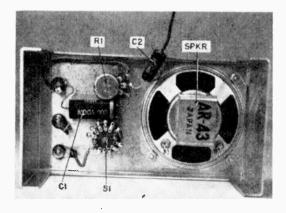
Chassis-mounted parts inside the box cover include the speaker, switch, potentiometer, jacks and two capacitors. Wire these in place separately.
